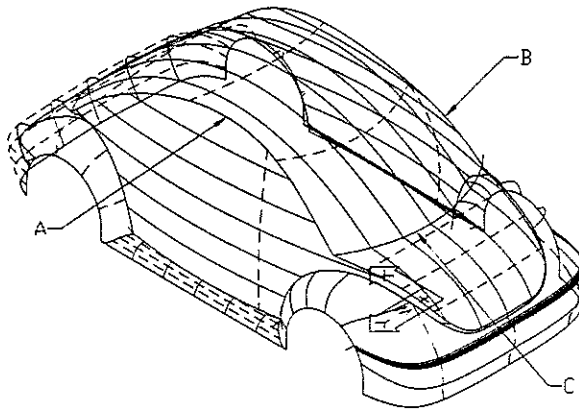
Skirt, side, front, and rear surfaces trimmed
